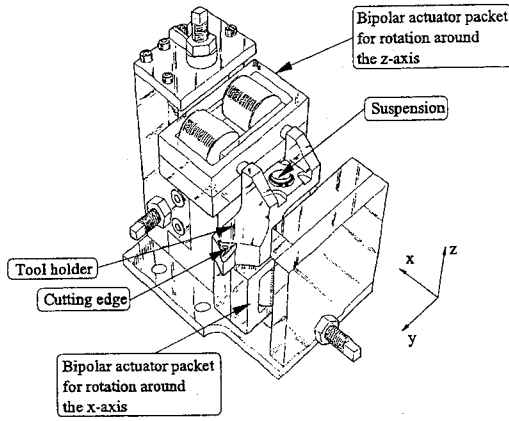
Tool holder with integrated actuators for the control of tool vibration in the metal cutting process [24]
